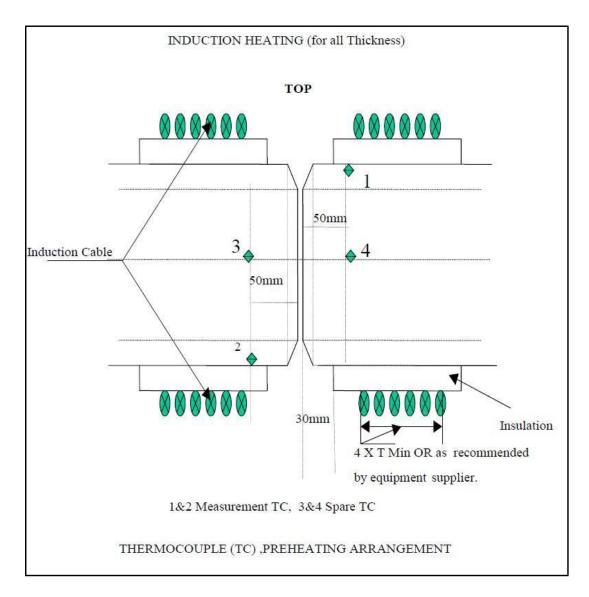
Placement of Thermocouples on P91/P92/F91/F92/C12A materials for Preheating
